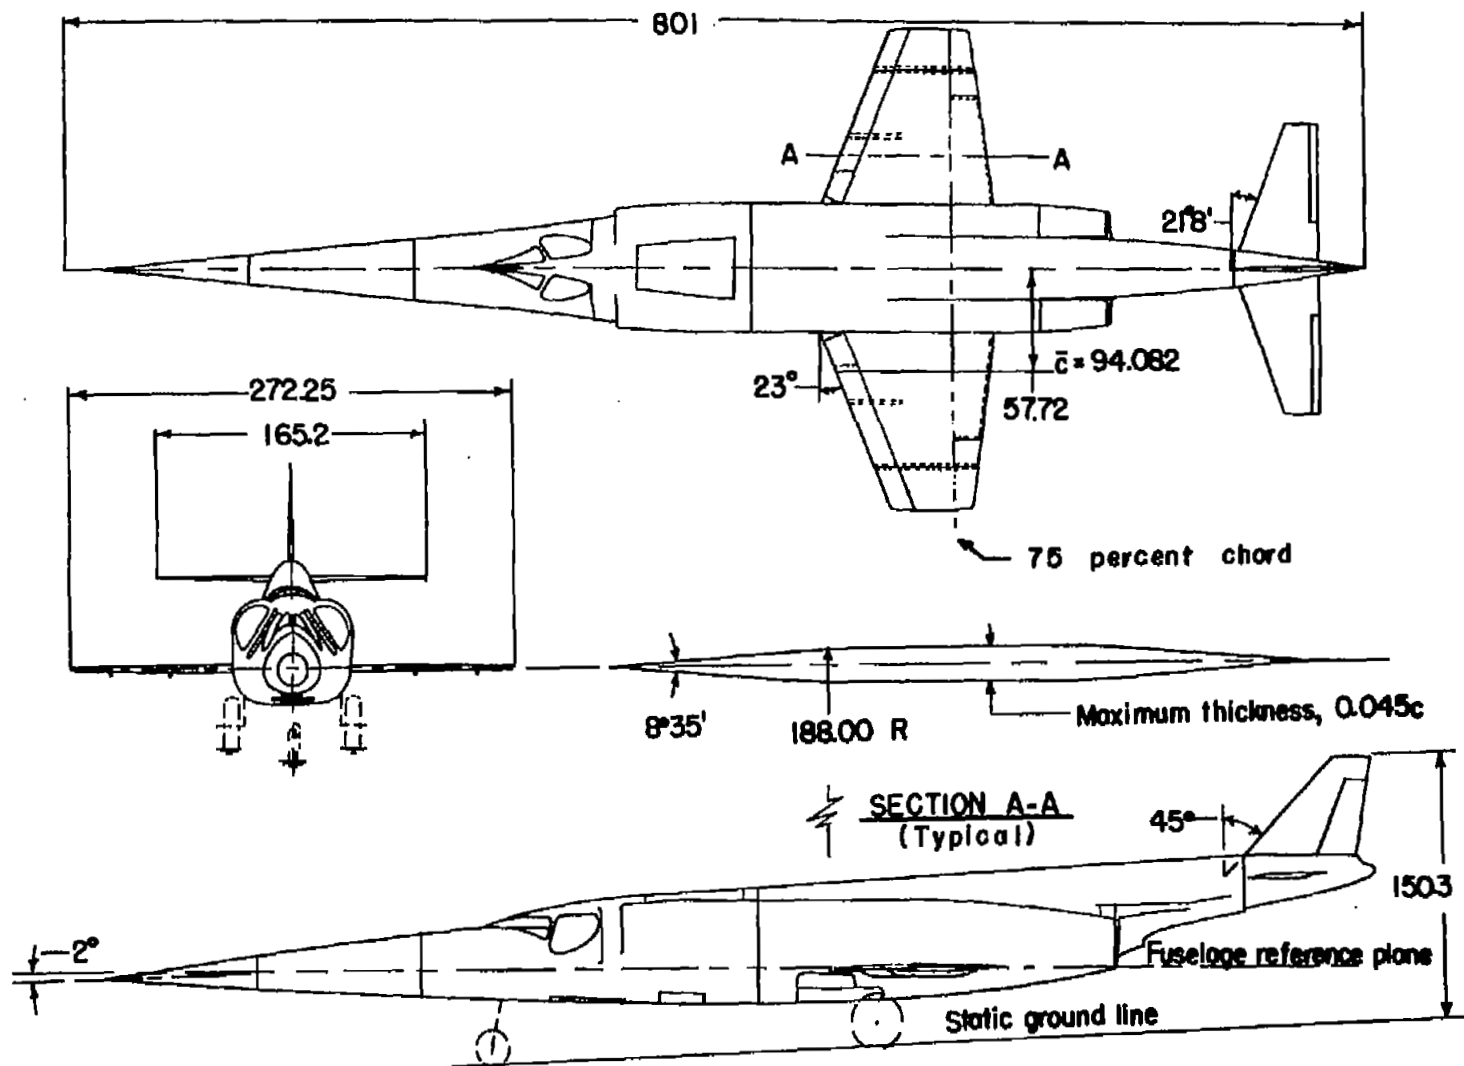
Three-view drawing of X-3 airplane. All linear dimensions in inches.
